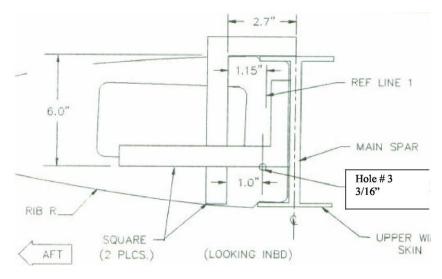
Locating Pilot Hole Left Hand Wing
